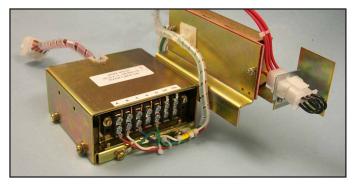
Sensor Harness Secured to the Back of the PT Module Assembly.
